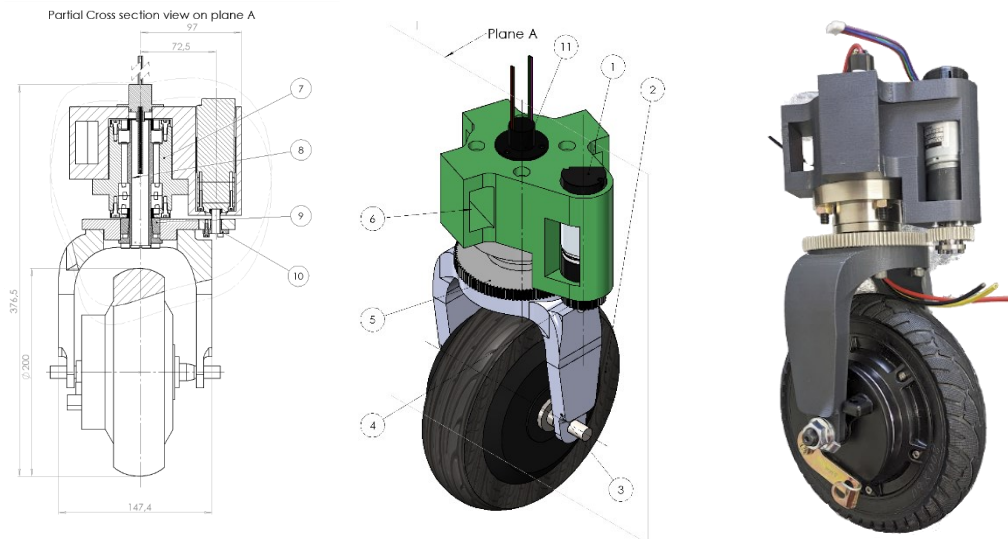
Design of the motor steering wheel module (L, M) and developed prototype (R).
